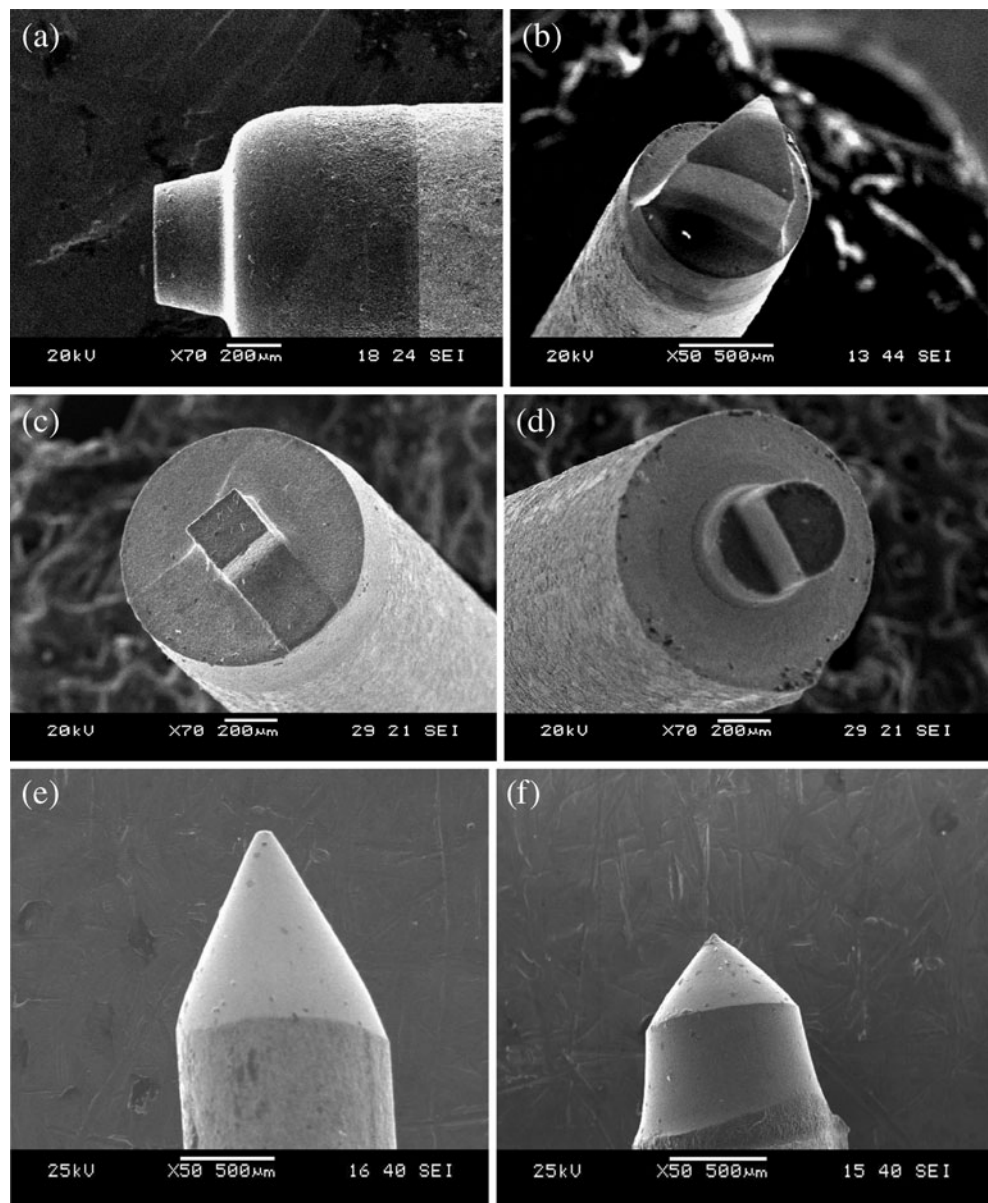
a Circular tool, b triangular tool, c square tool, d D-shaped tool, e conical tool of 60°, and f conical tool of 90°
